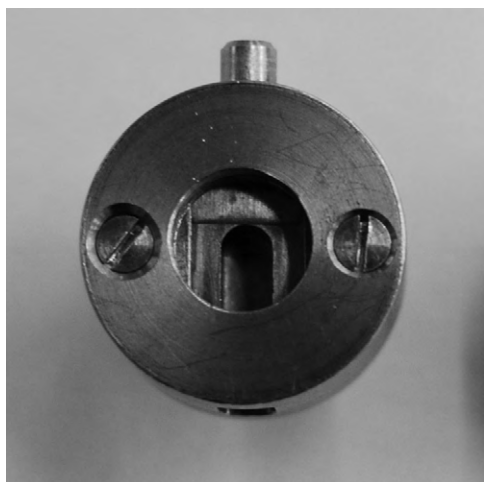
Cutting module viewed from the inner side, showing blade and outlet gap for cut doses.
